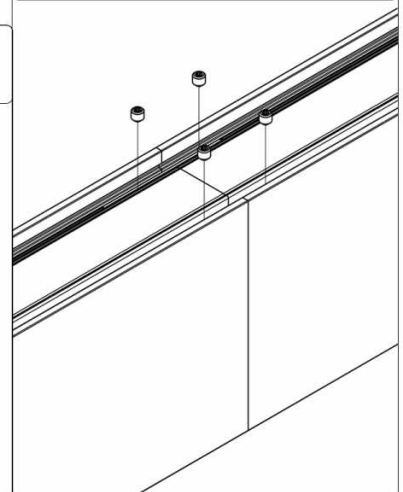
FASTEN GRUB SCREWS IN JOINER PLATE/BEND
